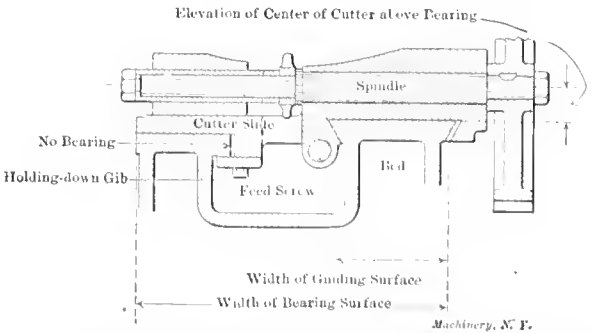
Cross-section through Cutter Slide of Typical Gear Cutter, Illustrating Certain Principles relating to Accuracy and Cutting Power.
